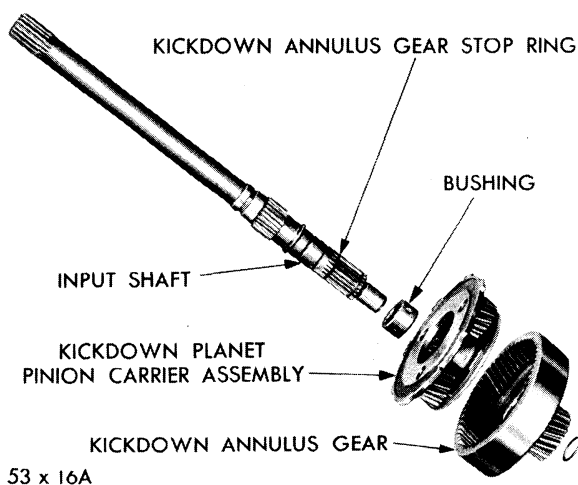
Input Shaft and Kickdown Planetary Gear Set (Disassembled View)
